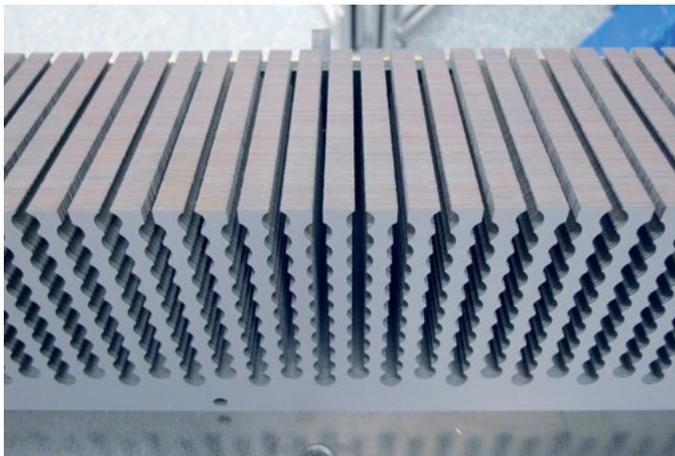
The G2 UU WEC stator sheet design. Figure taken from Paper X.
